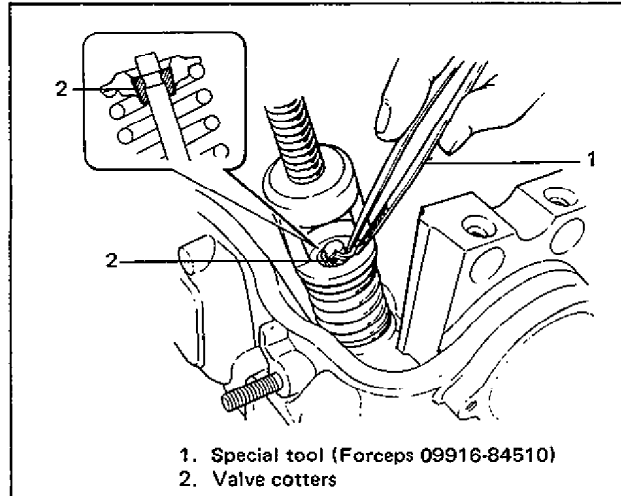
A-78 Special Tool (Forceps) and Valve Cotters
